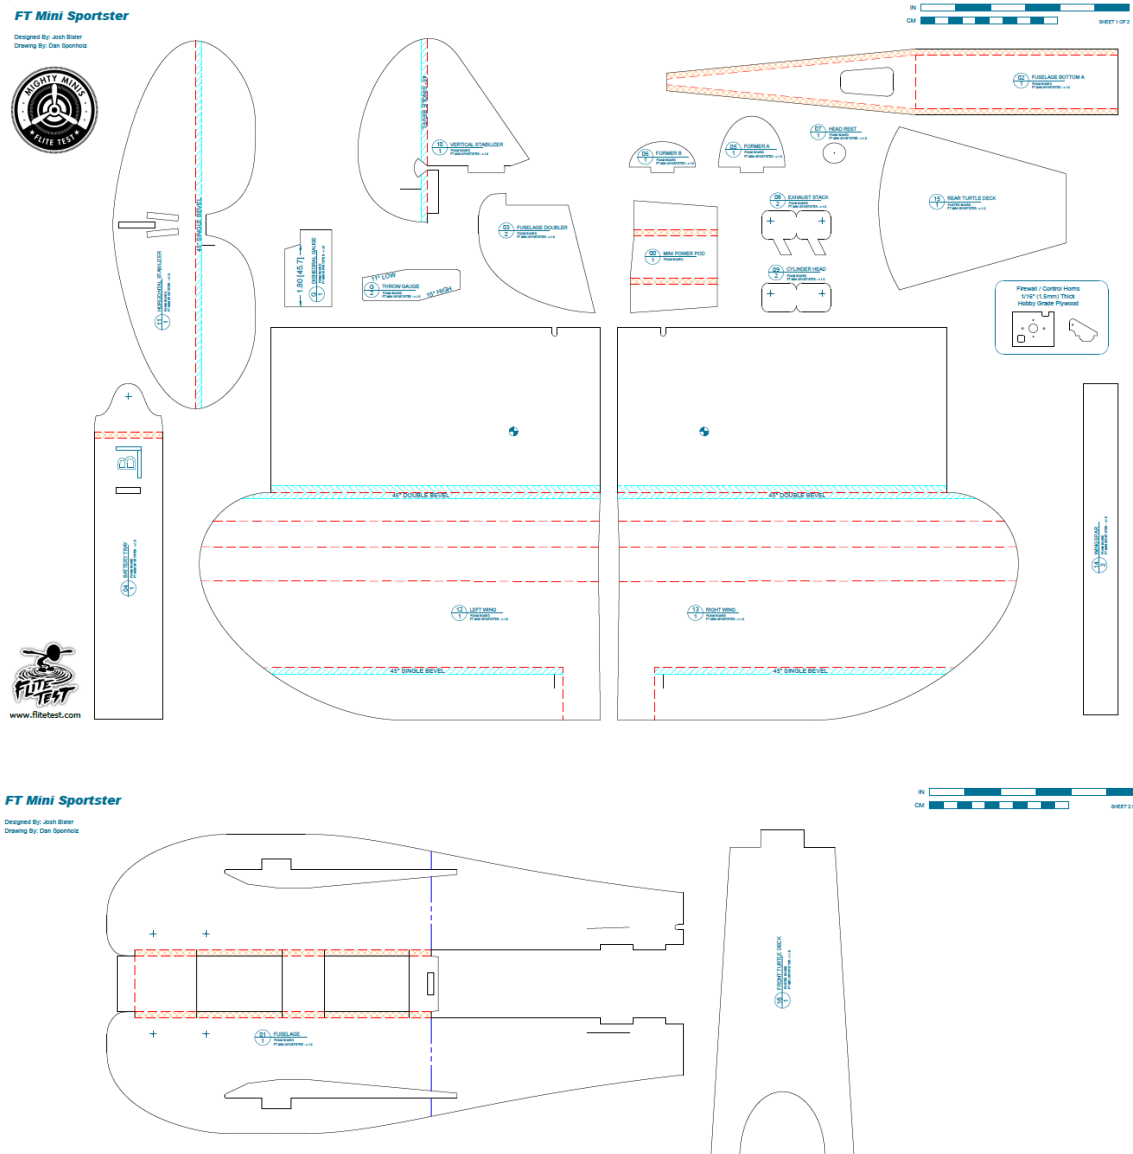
Flight Test Drawing of Mighty Mini Sportster.
